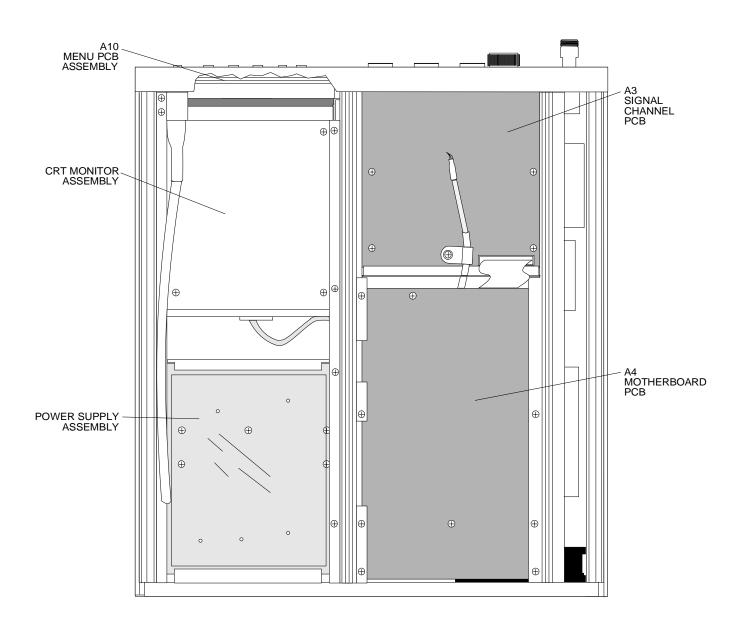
541XXA Major Assemblies Location Diagram (Bottom View)
